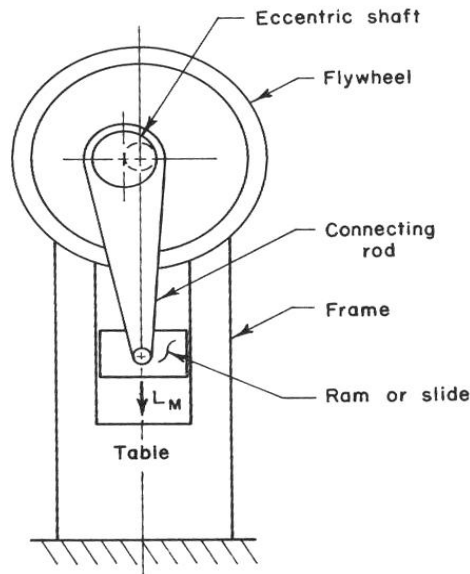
Drawing of Mechanical Forging with Eccentric Drive [7]
